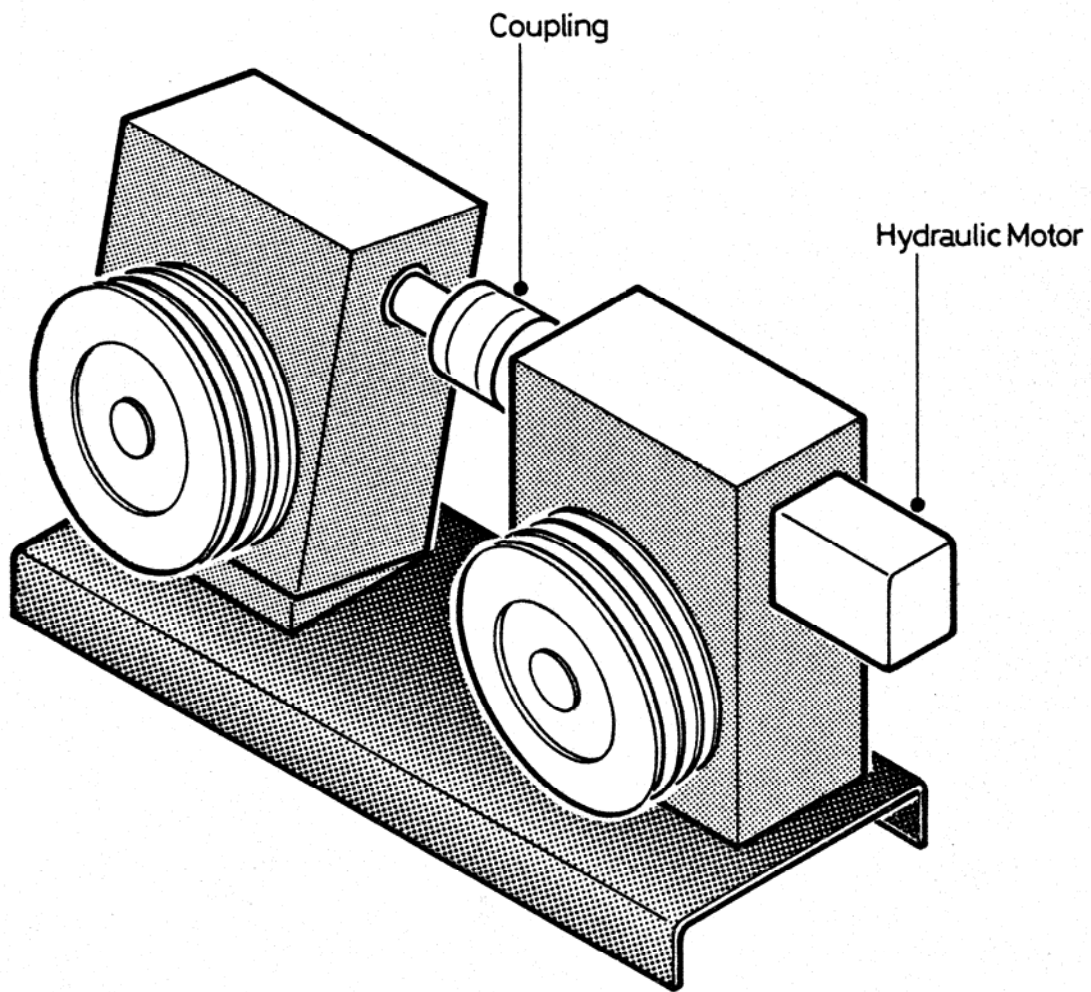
Twin Drum Winch Utilising Worm Reduction Gearboxes
